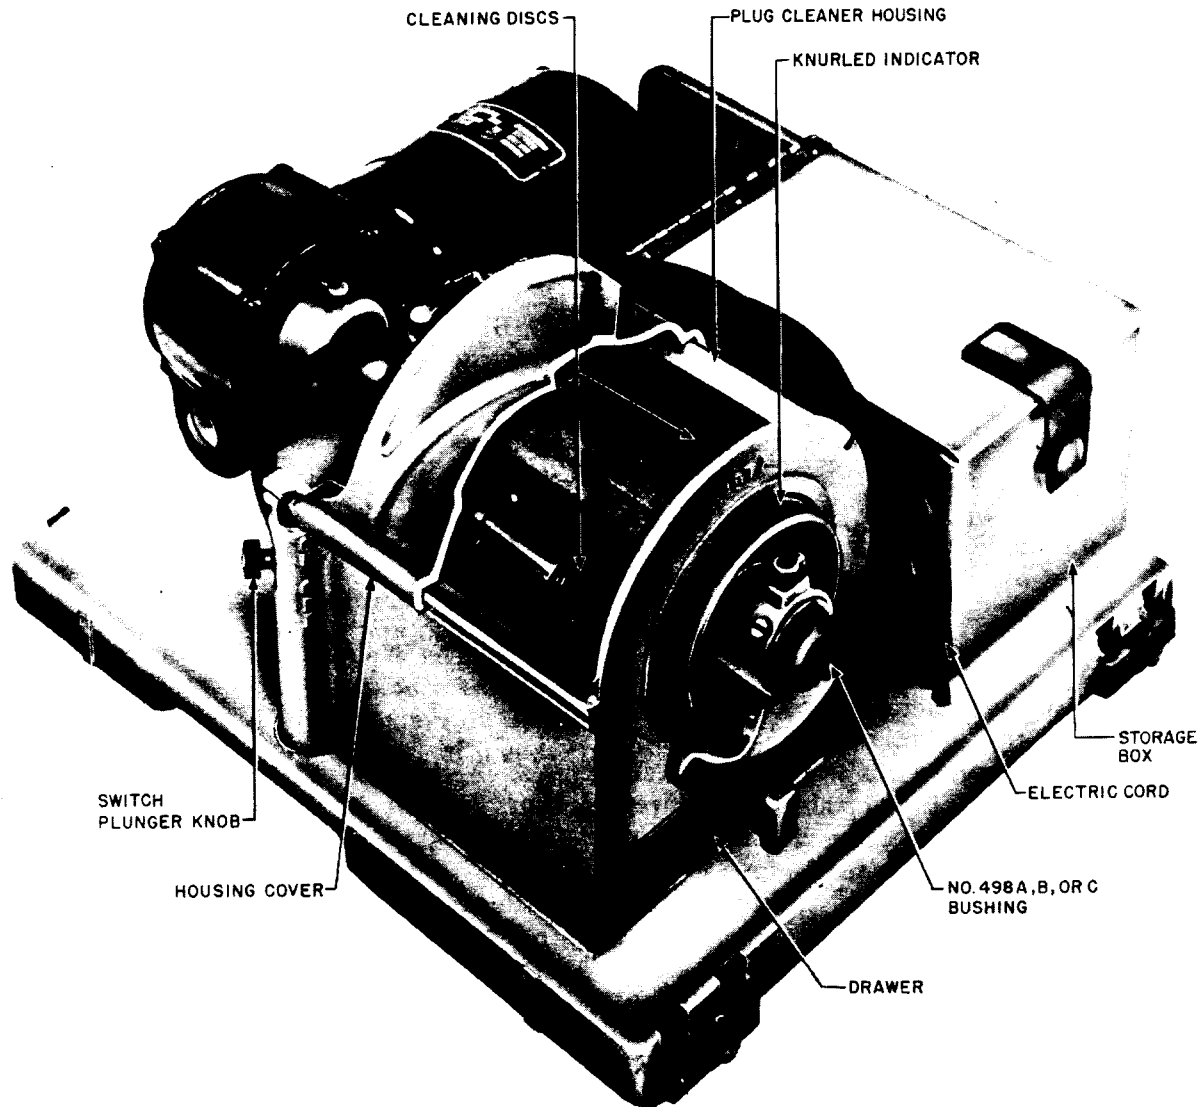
Portable Plug Cleaner (Outer Cover Removed) — No. 497A
